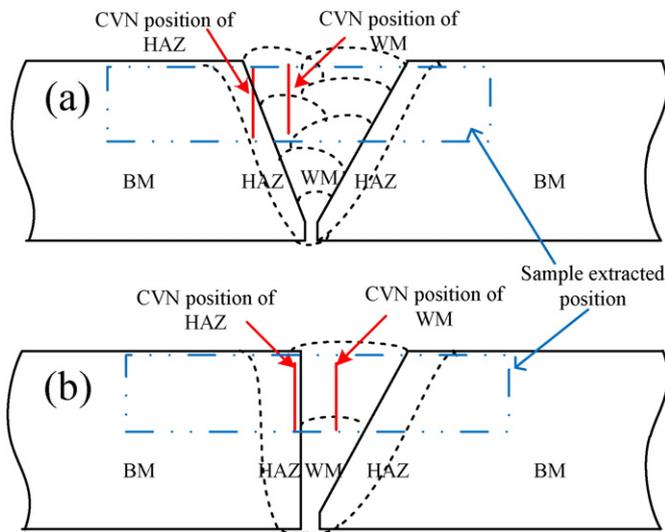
Schematic diagram showing double (a) and single (b) bevel V-type groove preparation. The extracted position of cross weld samples and CVN position are signified with arrows.
